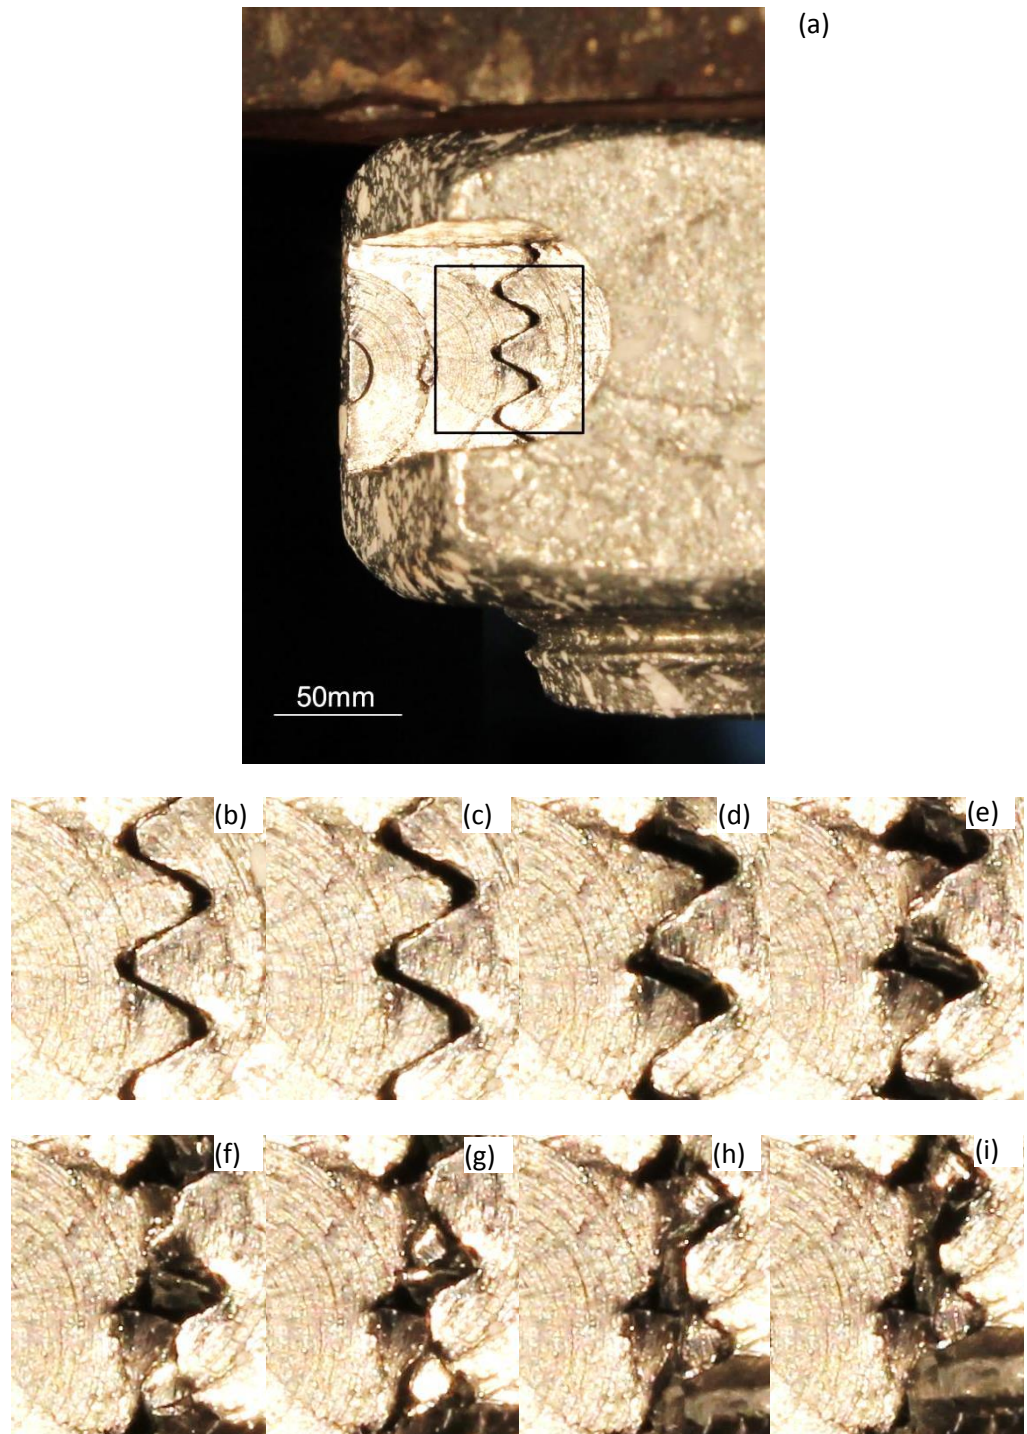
(a) Specimen tested with section milled-out to reveal thread interface and (b-i) images taken at different stages of the thread-stripping process
